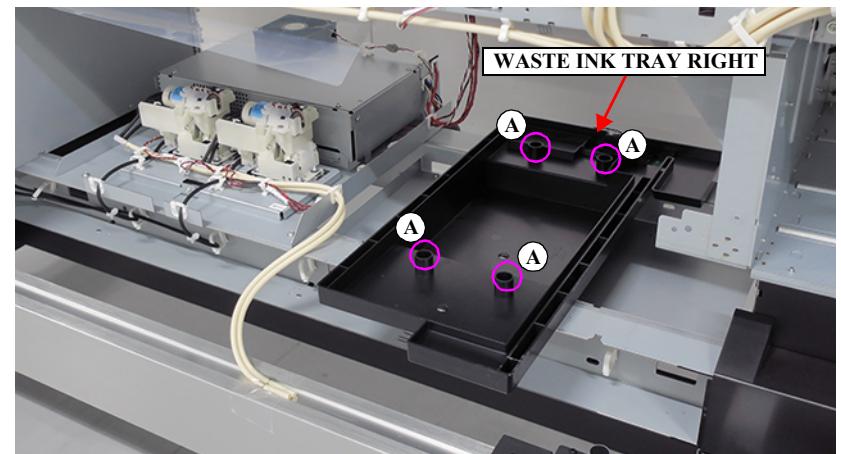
Removing the WASTE INK TRAY RIGHT
